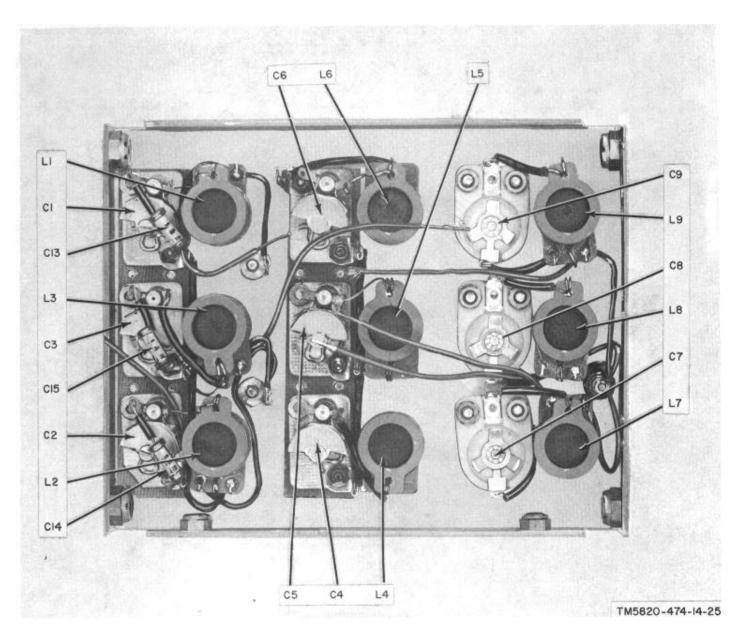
Receiver, bottom inside view of rf- if, chassis.
